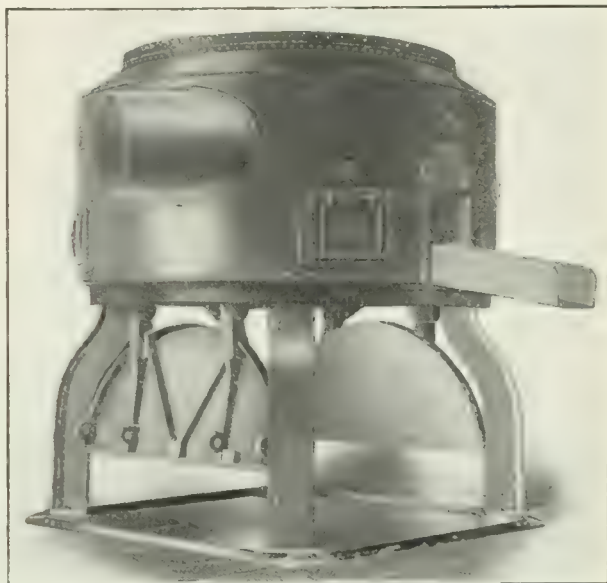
Body Section of the Standard Cupola Built by the Whiting Foundry Equipment Company, Harvey, Ill.
